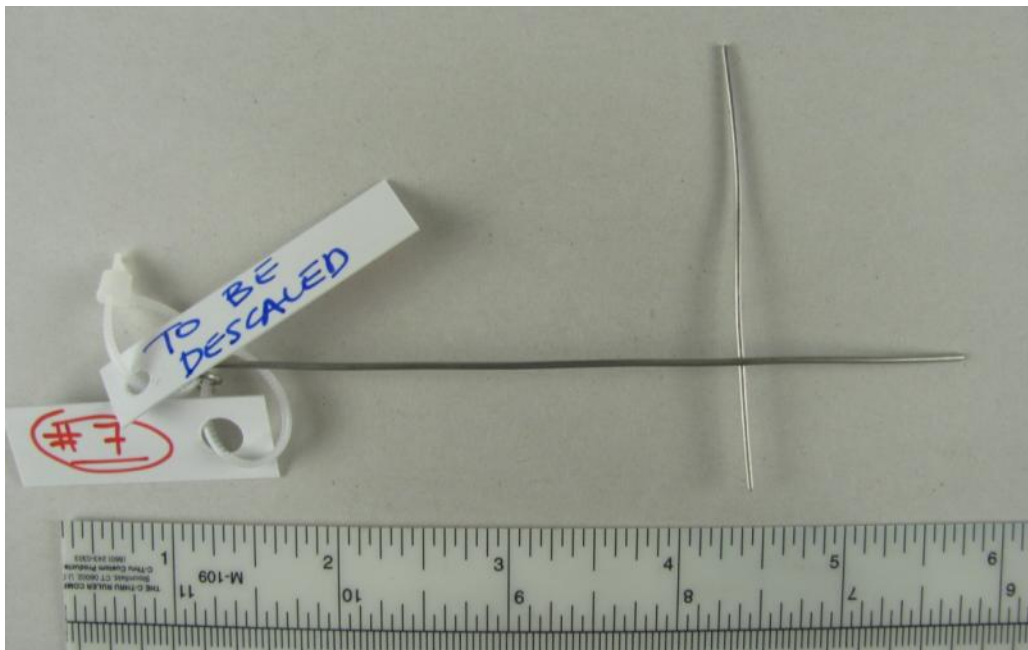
Macro photograph showing one of the Type 316L solid wire weld samples to be descaled / passivated prior to salt spray testing. Sample #7 is shown.
